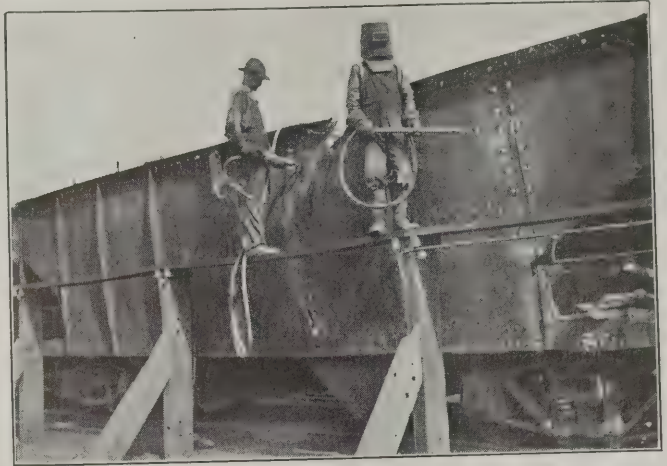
After the Rivet Heads Are Burned Off the Rivets Are Backed Out With a Pneumatic Tool
